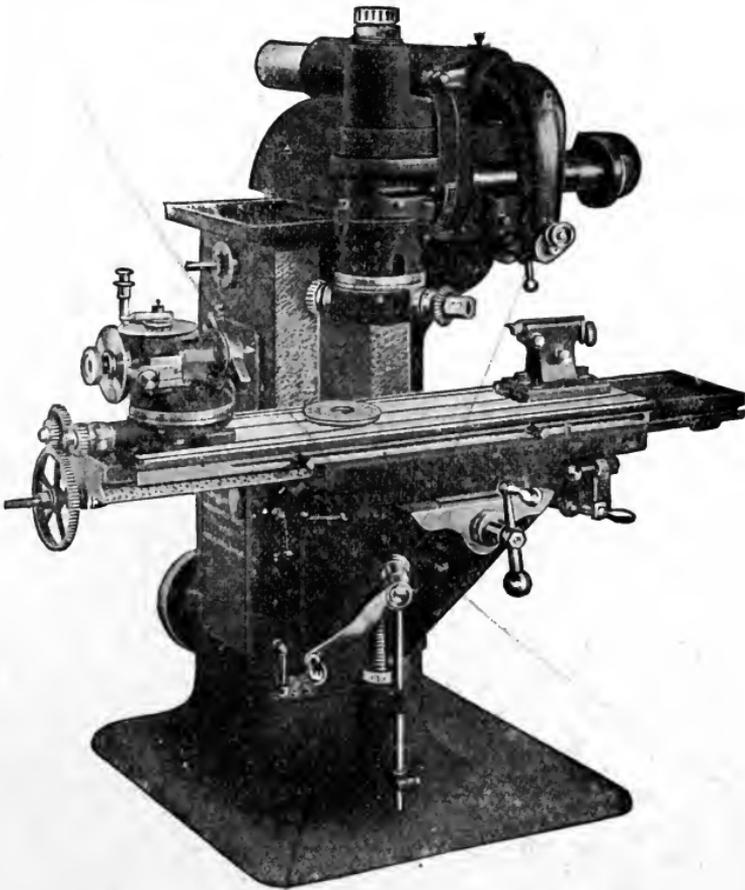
Duplex Milling Machine Set for Cutting Spirals
